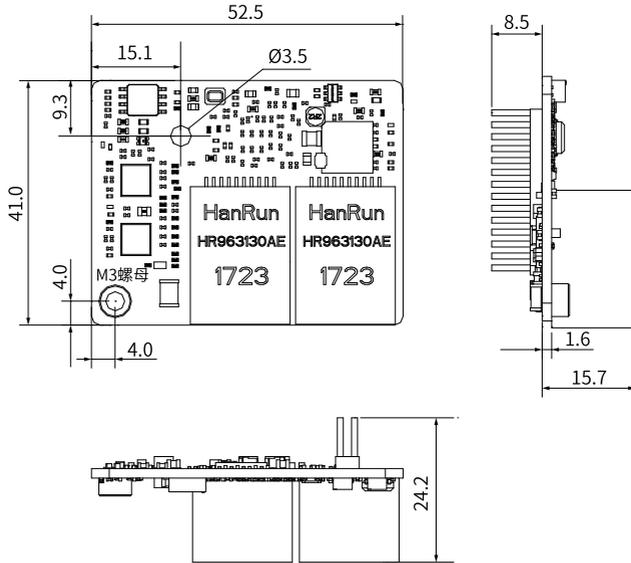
Dimensions (unit: mm) of the MD500-ECAT card
